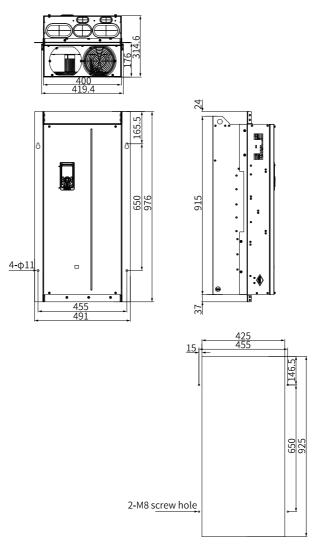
Mounting-hole dimensions (mm) of MD580-AZJ-A2T9
